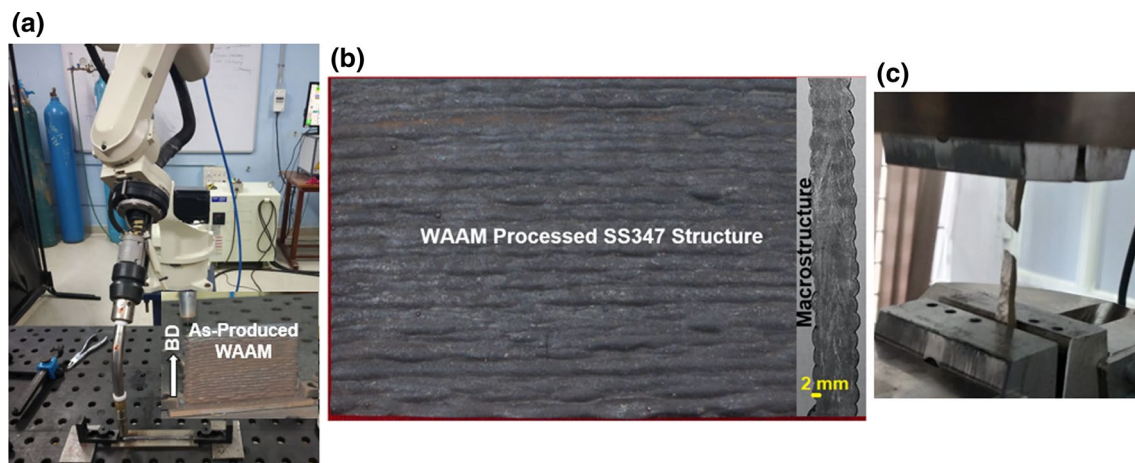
WAAM processing sequence: a GMAW robotic welding setup, b As-deposited WAAM plate with macrostructure, and c WAAM sample subjected to uniaxial tensile test
